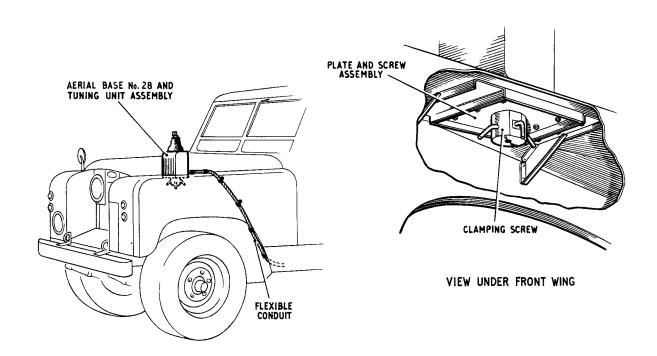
FITTING THE DISMOUNTABLE VHF ATU TO THE LH FRONT WING
